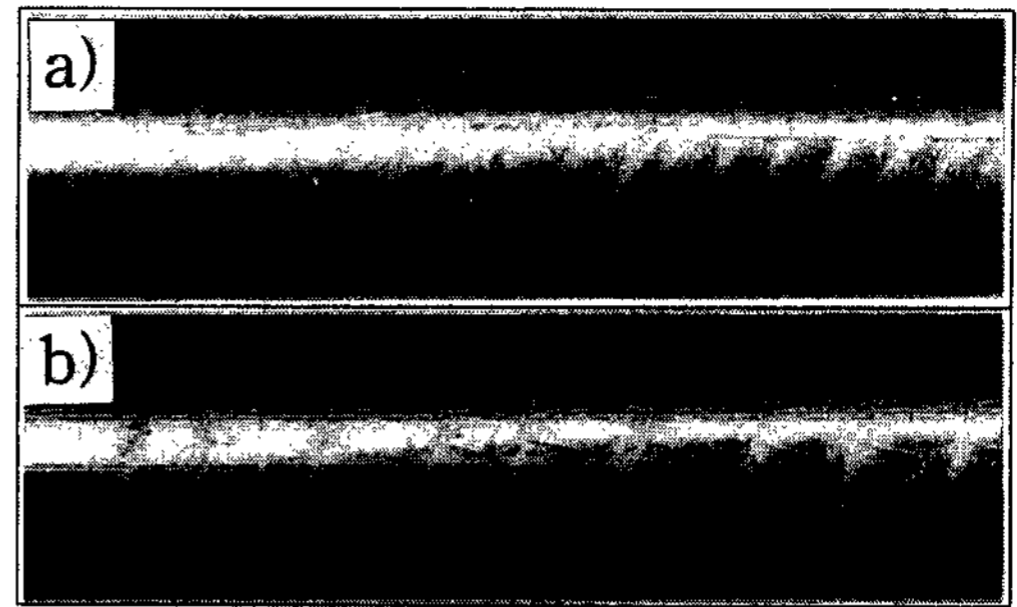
Surface appearances of Al-17.5%Si alloy bars produced by horizontal continuous casting. a) condition A b) condition B.
